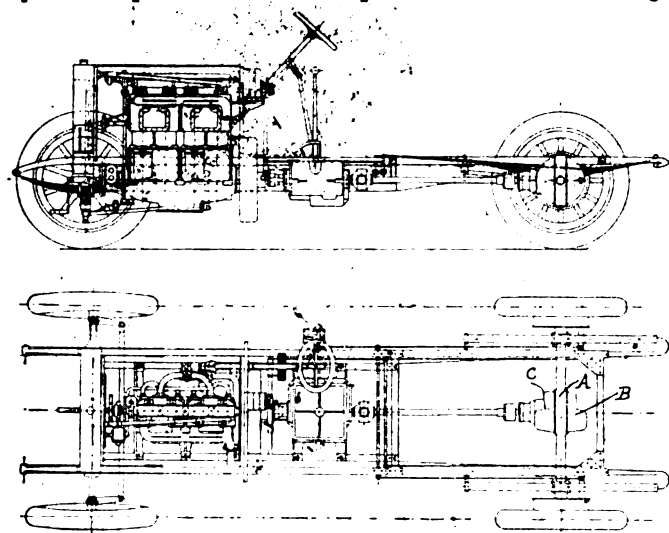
Elevation and Plan of the Maudslay 25-30-h.p. Live Axle Car. The part marked A is forged in one piece with the axle sleeves, B and C being detachable casings.
